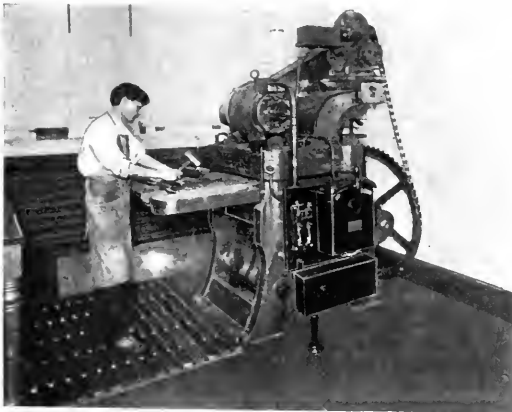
MOTOR-DRIVEN MOLDING PRESS IN FOUNDRY.
